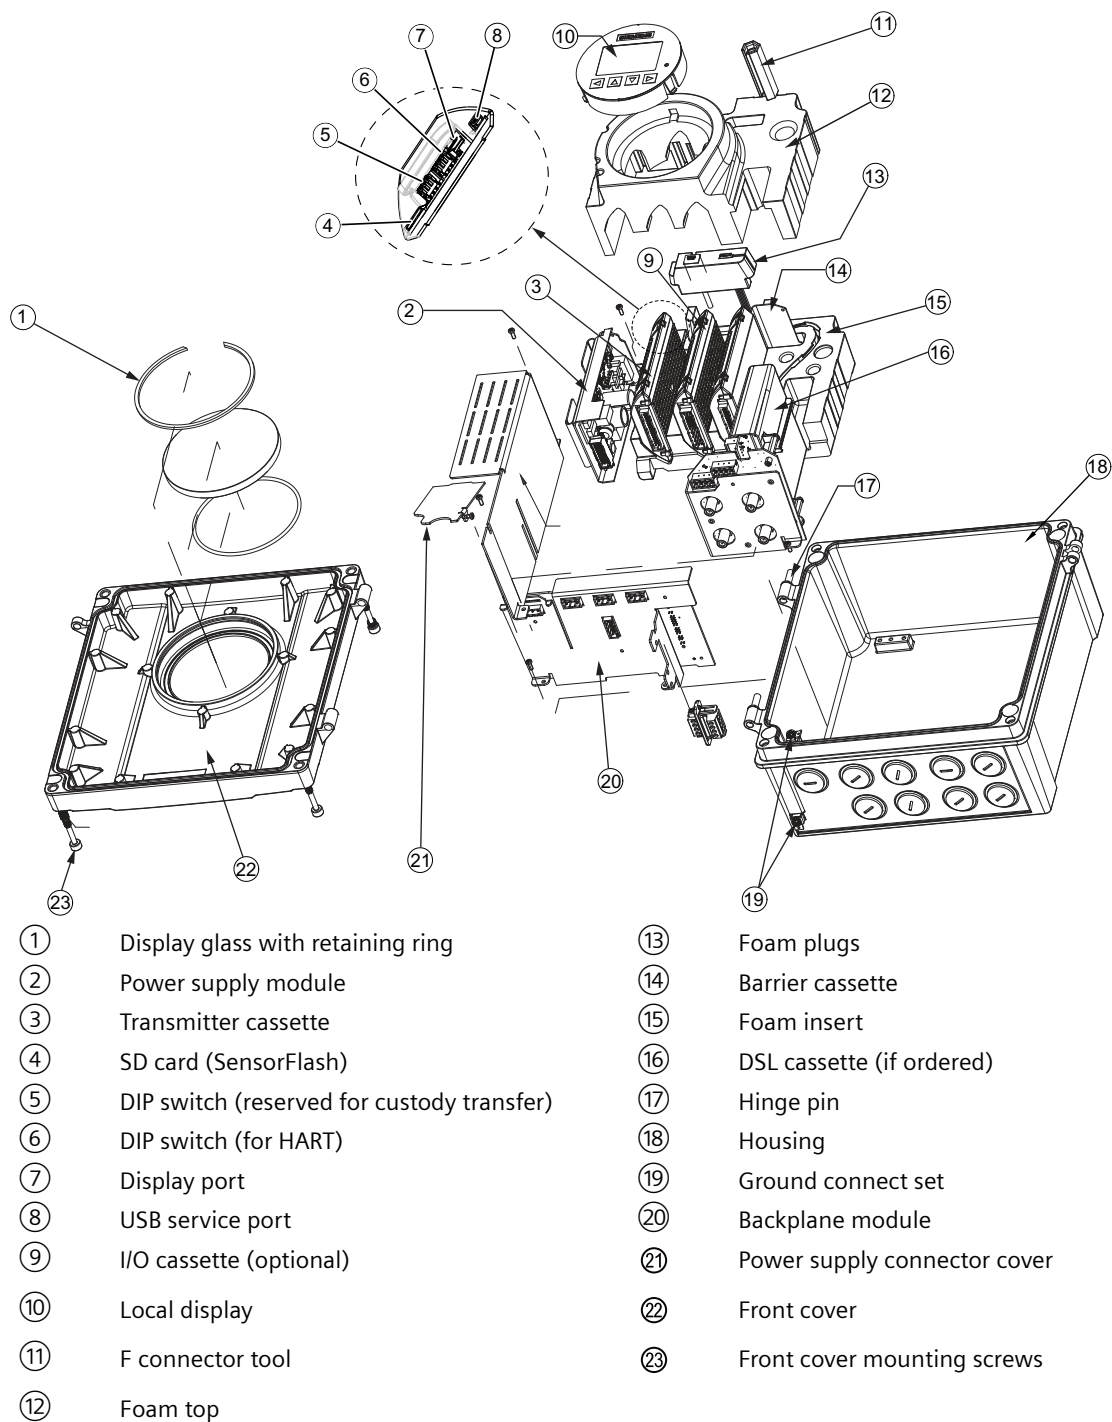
Wall mount enclosure transmitter variant exploded view
